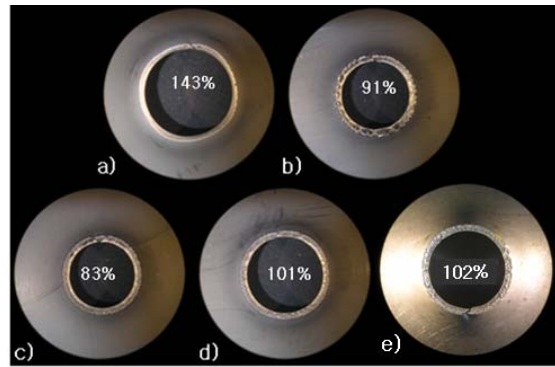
Typical fractures of FB590 2.9mm materials observed in hole expansion test for various clearances: a) Laser b) 2% c) 9% d) 13.5% e) 22.5%
